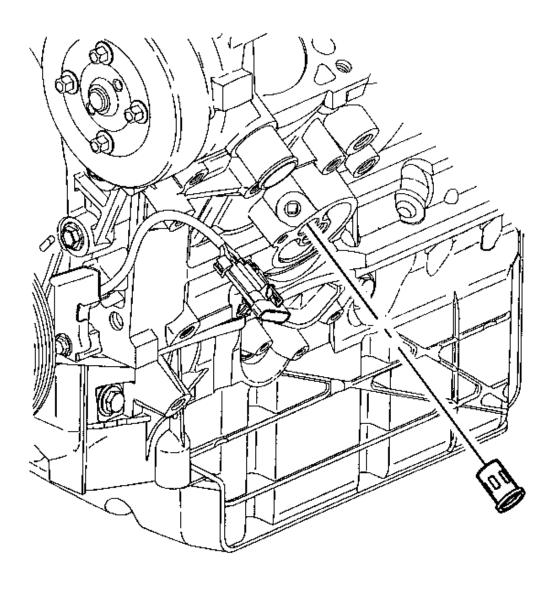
Removing Oil Filter Bypass Hole Plug Courtesy of GENERAL MOTORS CORP.
